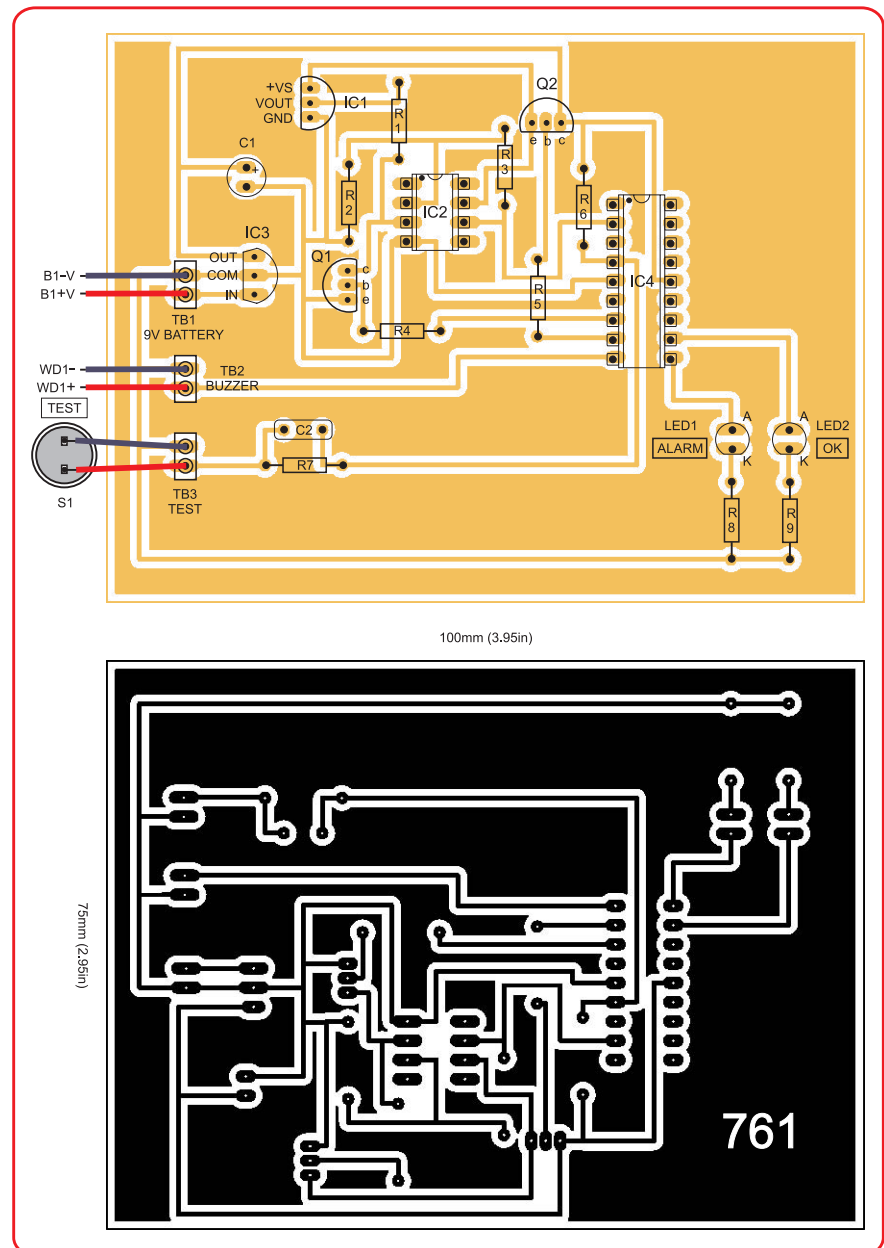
Printed circuit board topside component layout, off-board lead-off details and full-size underside copper master
